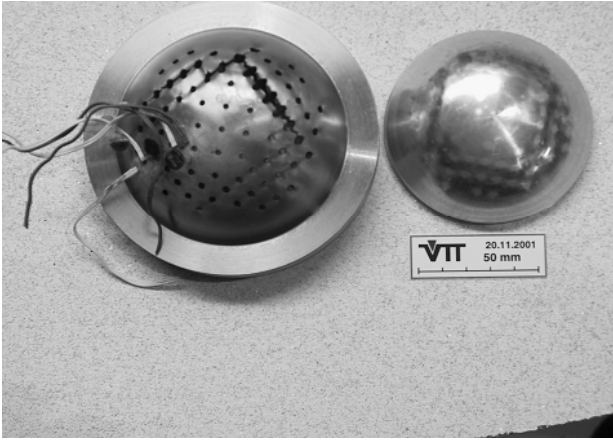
Specimen EZ1 (small size) after testing, shown with the liner (left). Right: Specimen FB after testing. The test ended due to the failure of the liner.
